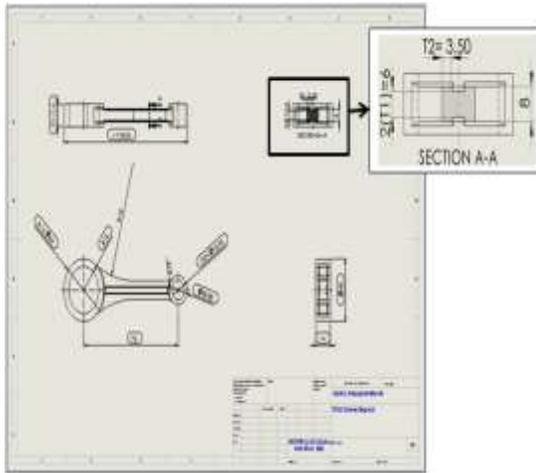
Drawing of the connecting rod showing few of the dimensions that are design variables and dimensions that cannot be changed
